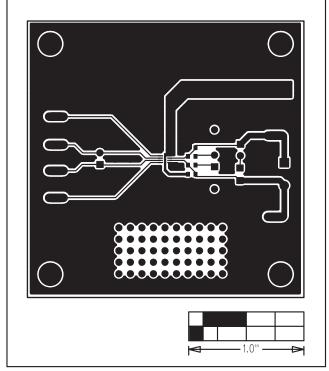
MAX13485E EV Kit PCB Layout—Component Side
